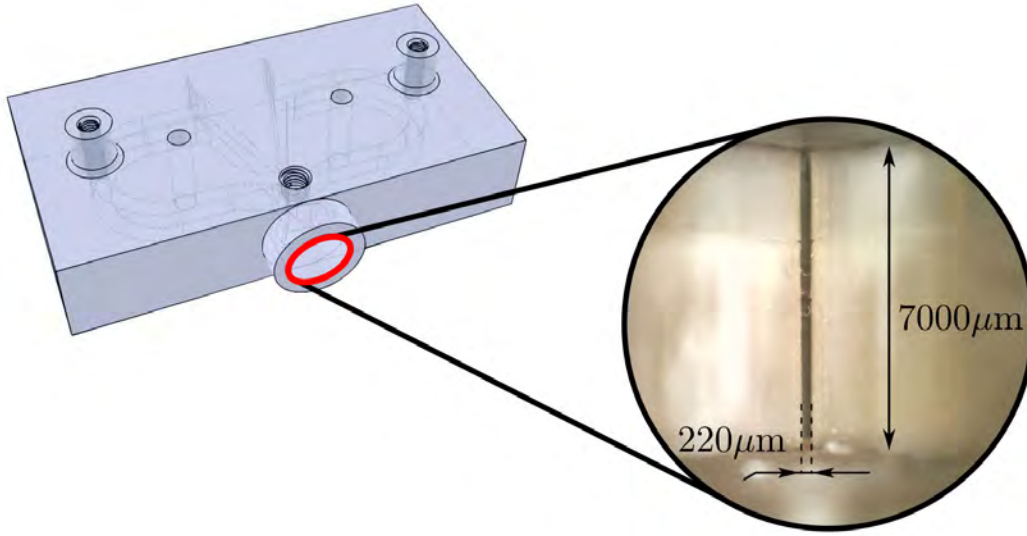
Microscope image of the inlet section of the fluidic oscillator which shows the high dimensional accuracy of the 3D-printer used.
